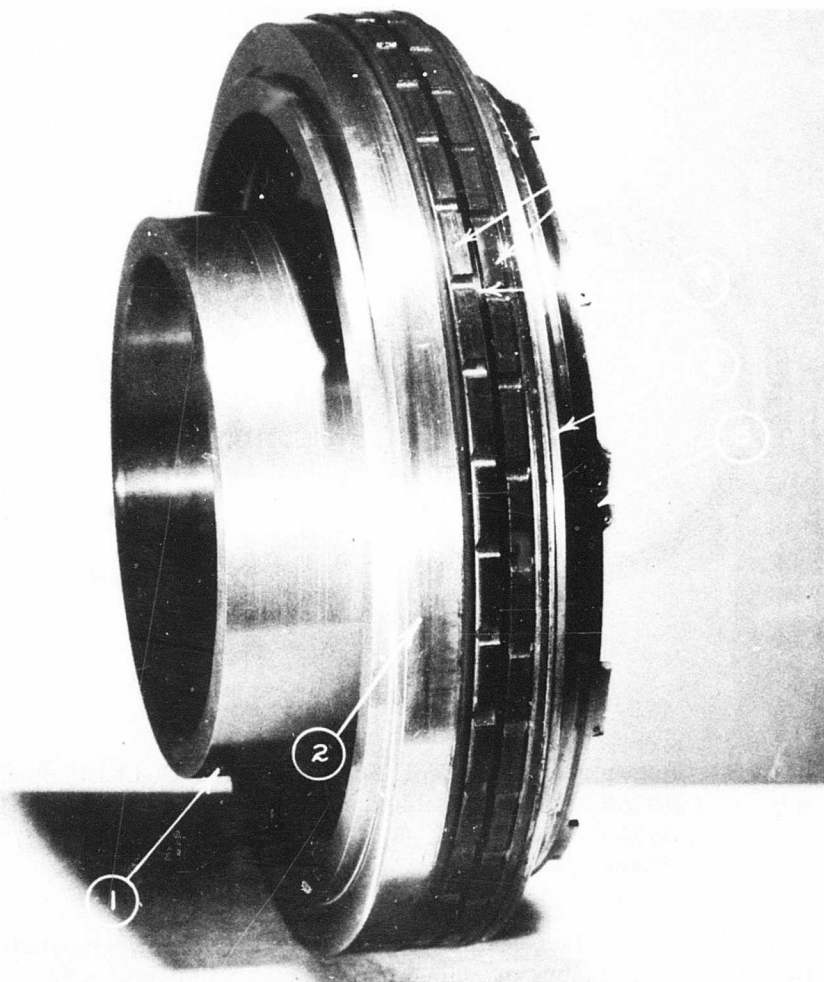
Regenerator I.D. Seal, Split One-Piece Conically Sprung Ring Seals Assembled, Showing (1) Hub, (2) Tapered Seal Plate, (3) Conical Carbons, (4) Untapered Seal Plate, (5) Locking Nut, and (6) Wavy Spring Washer.
